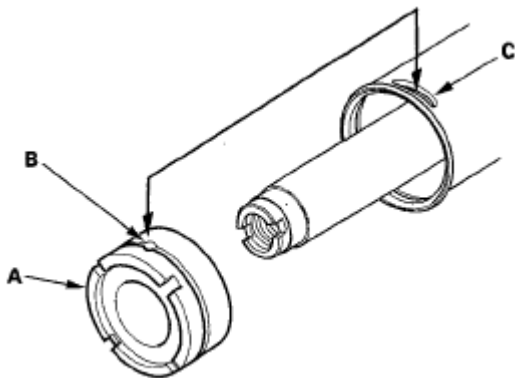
Identifying Rack Stop Onto Steering Rack Hole
